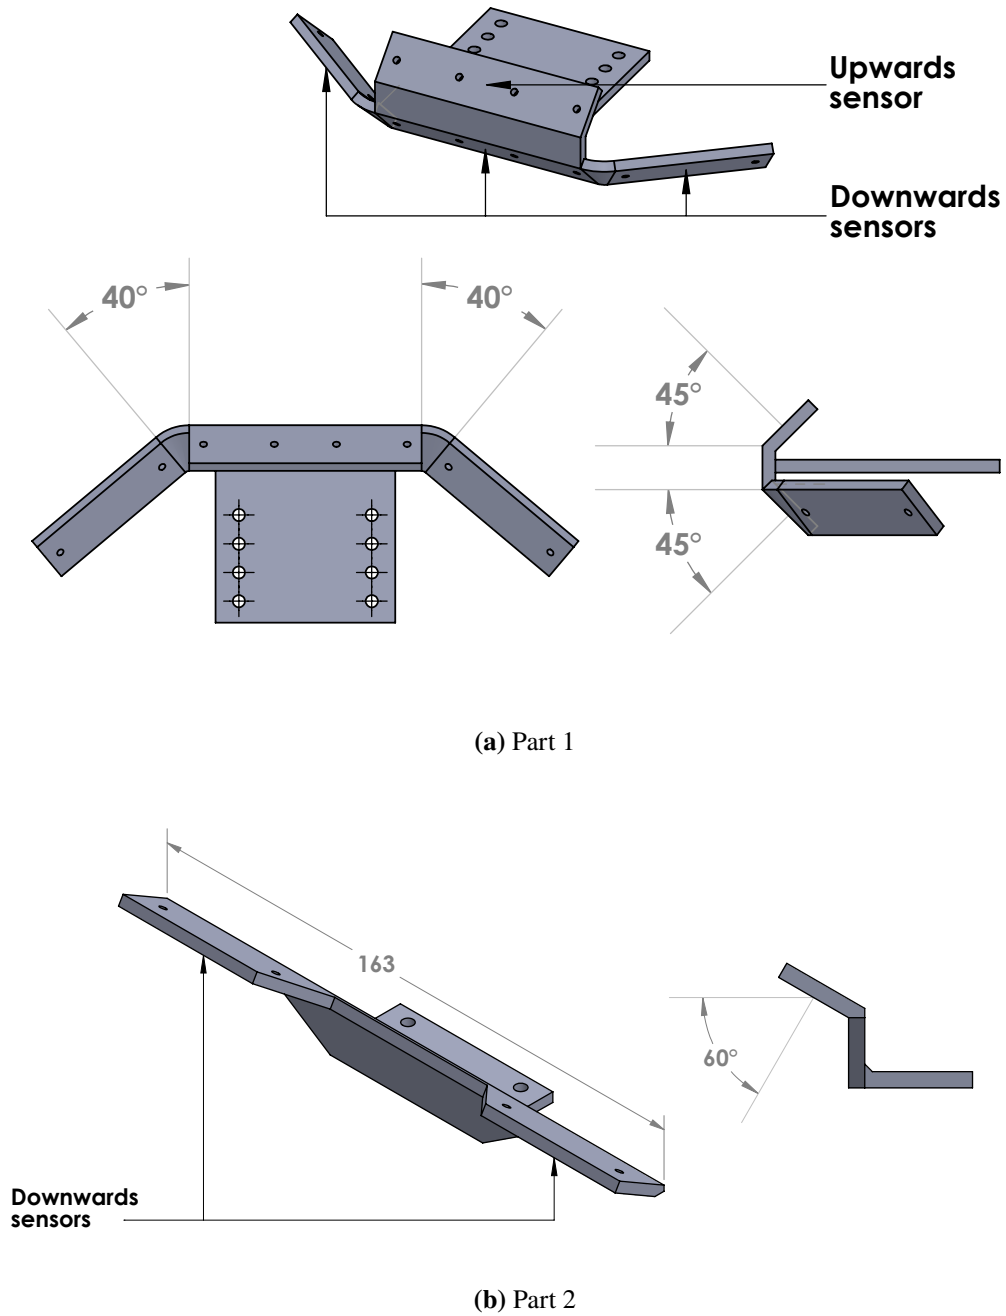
CAD model of Prototype 6 with dimensions [mm]
